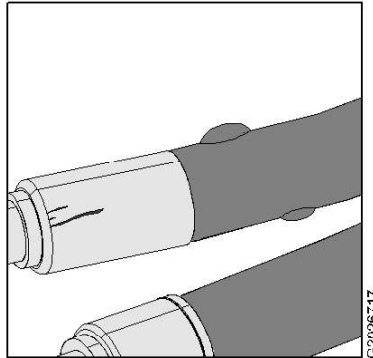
Cracks on the clamping sleeve or blisters on the outer jacket
